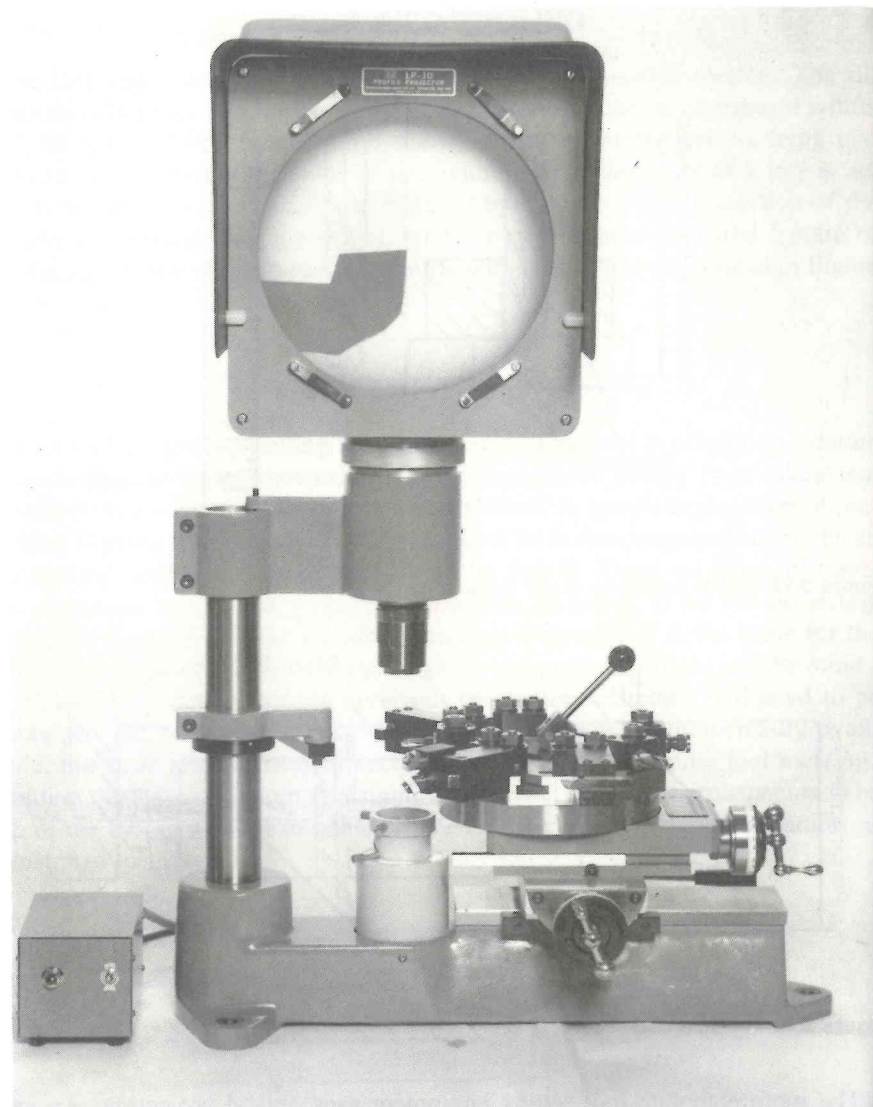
Presetting tooling on a replacement turret using optical projection.
